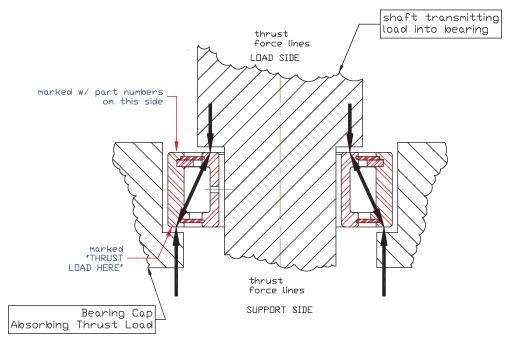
1905 Bearing - Bottom Bearing Cap Application
